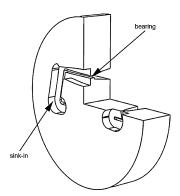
Bearing and variable sink-in layout on a flat die (from Ref. [12]).
